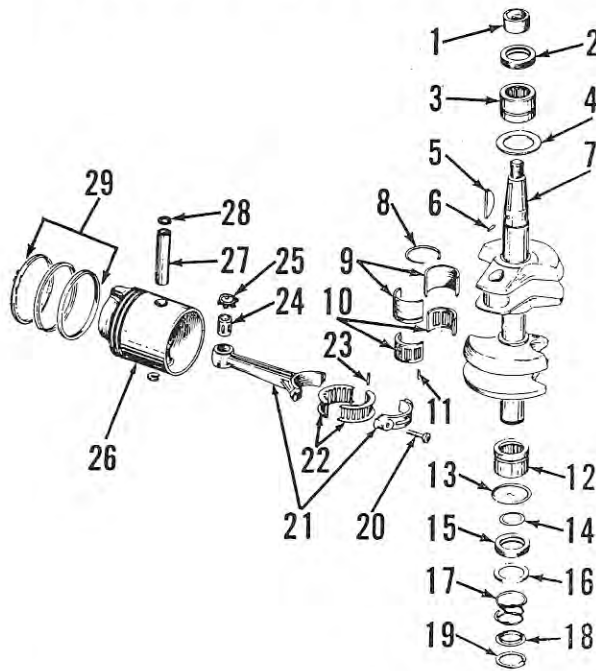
Power head crankshaft, piston, rings and bearings.
